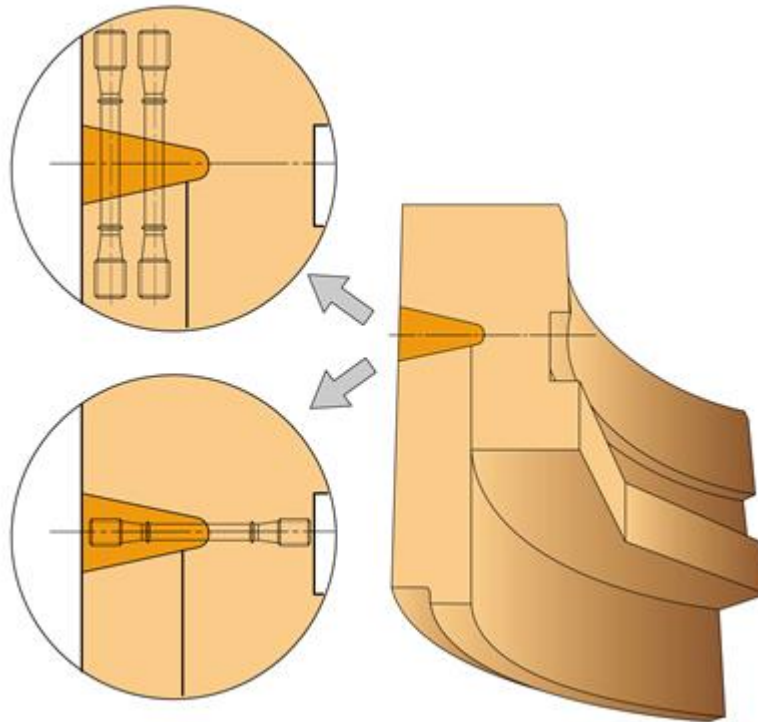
Uniaxial cross weld specimens removed from the FSW in axial and radial directions.
